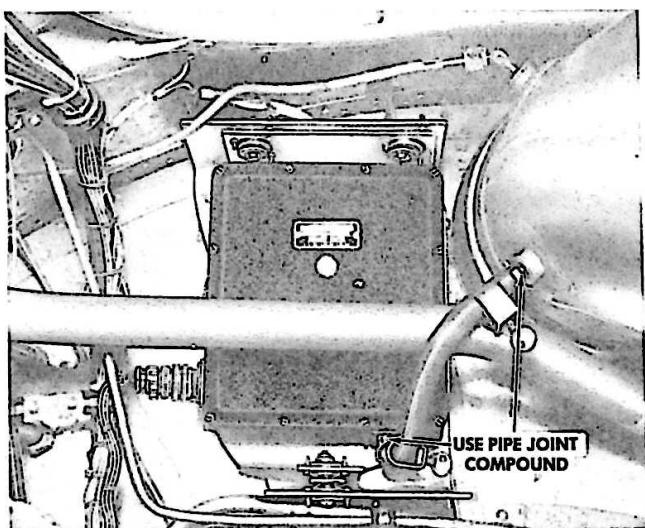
Pressuretrol Mounting, B-17 Airplanes
